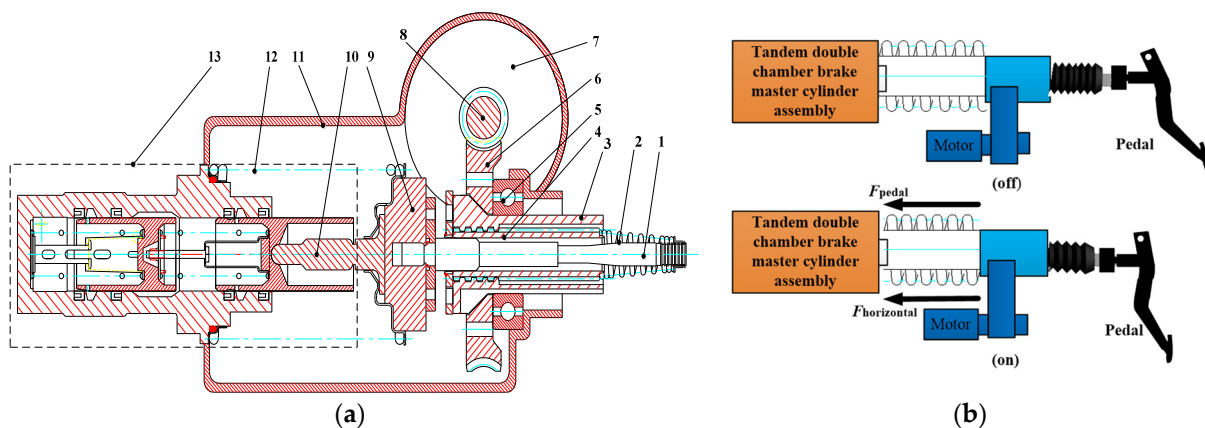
The electric servo booster structure. (a) Mechanical structure of electric servo booster. (b) The working states. 1—input push rod; 2—cone spring; 3—nut; 4—lead rod; 5—deep groove ball bearing; 6—turbo wheel; 7—power motor mounting hole; 8—worm; 9—feedback disk; 10—master cylinder push rod; 11—housing assembly; 12—return spring; 13—tandem double chamber brake master cylinder assembly.
